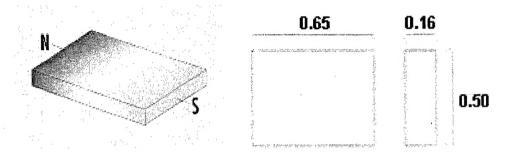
Shape and the dimensions of the used permanent magnet pieces
